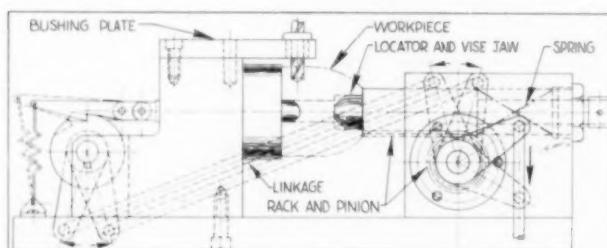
The retractable locating pin shown incorporated in a drill jig. A spring plunger, shown at right, acts both as locator and vise jaw and works in synchrony with the retractable locating pin by means of linkage. This is but one of many applications.
